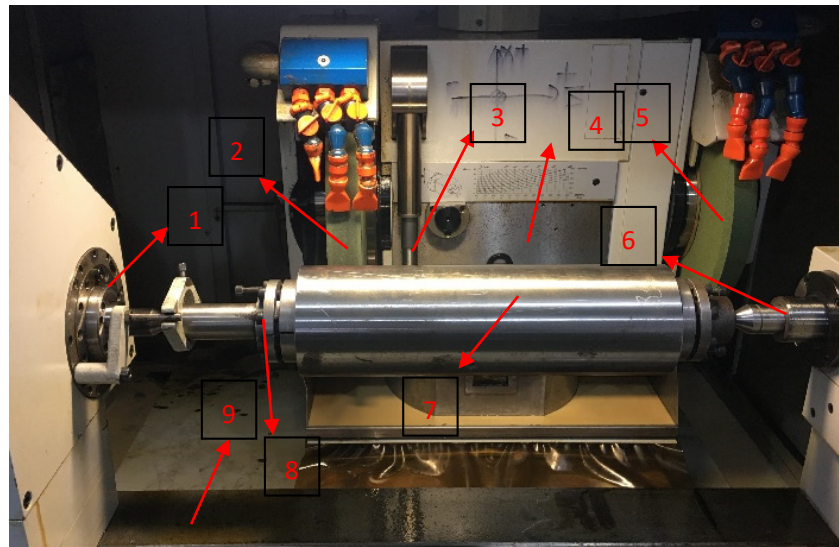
Actual machining site of motorized spindle. 1—workpiece C axis; 2—cylindrical grinding wheel; 3—ruby probe; 4—axis B; 5—30° end face grinding wheel; 6—tailstock; 7—motorized spindle part; 8—tooling fixture; 9—guide rail.
